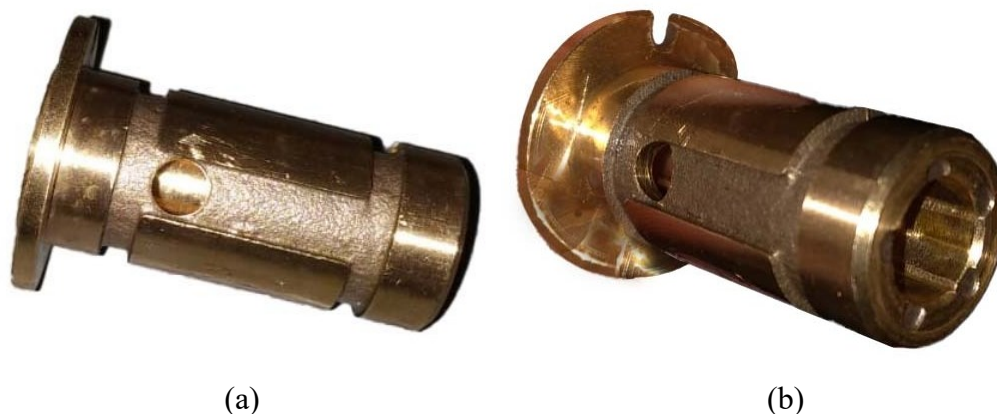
(a) The fluid film journal bearing lateral view and (b) the isometric view.
